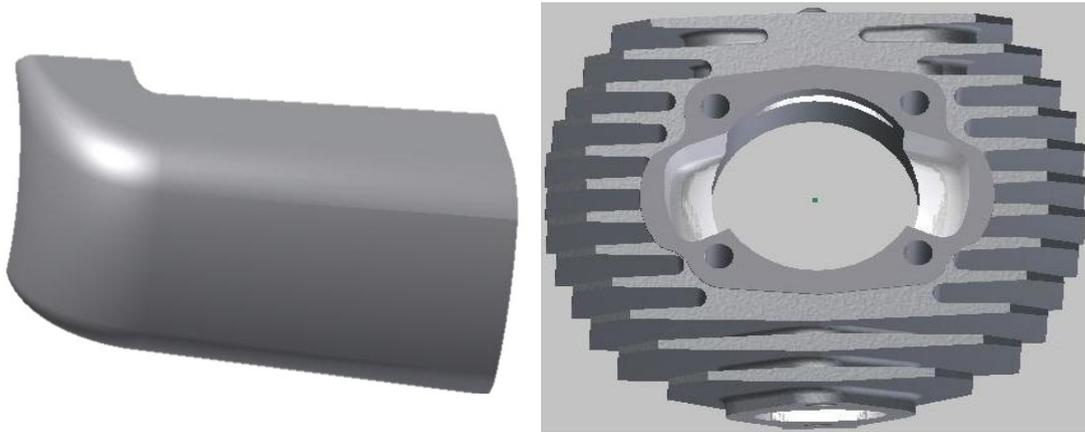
(a) Optimized of channel; (b) The cylinder with stamping of transfer channels.
